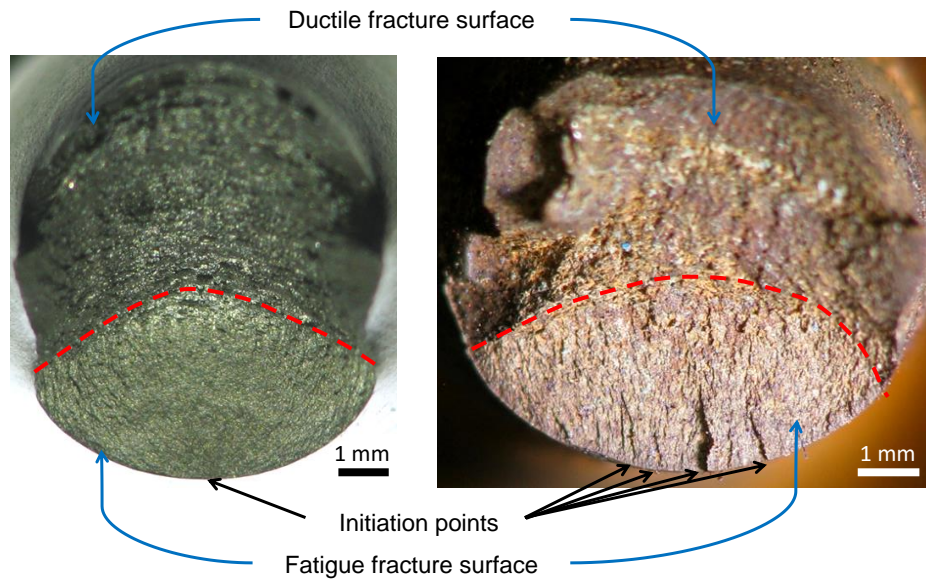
Fatigue fracture in air (left) and fatigue fracture in seawater (right)
